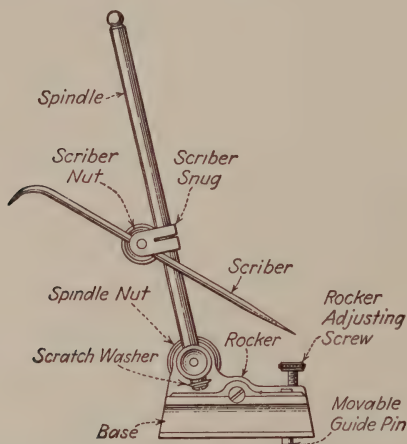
Surface gauge. This is an invaluable tool in planer work for scribing lines and for leveling either a surface or a line. (Courtesy of The L. S. Starrett Company.)
